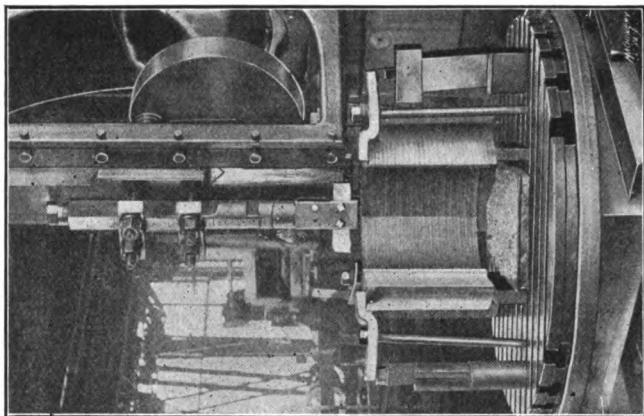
Machining the Bore of a Stack of Liners on the Slotter
